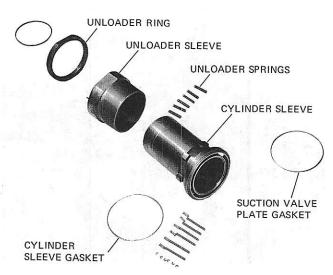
UNLOADING CYLINDER SLEEVE — EXPLODED VIEW
